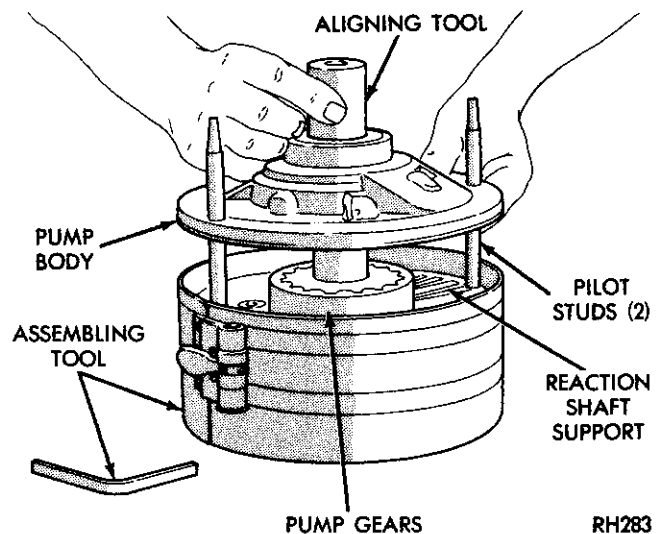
Assembling Oil Pump And Reaction Shaft—999
